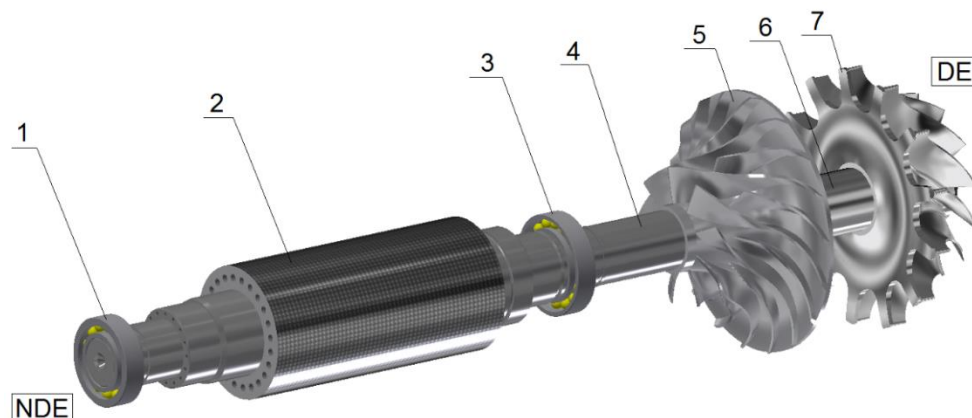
Rotating system of the 30 kW gas microturbine (1 – NDE ball bearing, 2 – generator rotor, 3 – DE ball bearing, 4 – shaft, 5 – compressor disc, 6 – foil bearing, 7 – turbine disc, NDE – non-drive end, DE – drive end).
